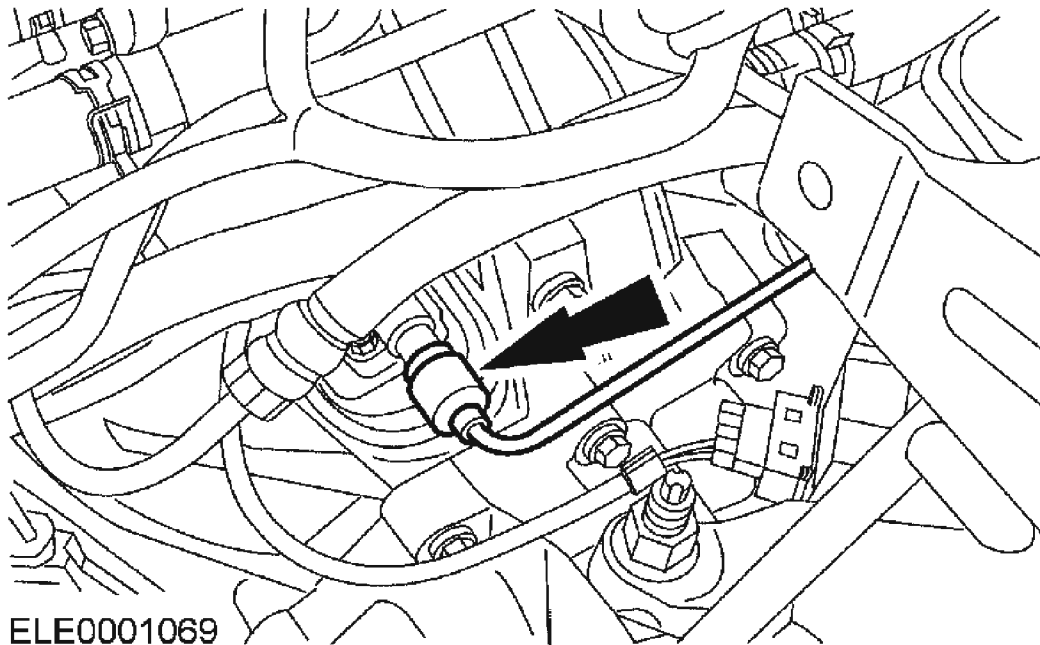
Removing Clutch Slave Cylinder Supply Tube
